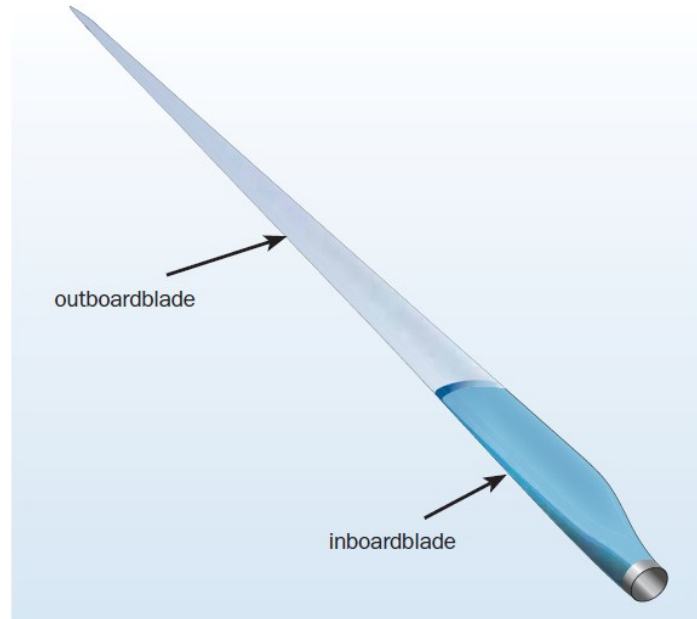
Sectional blade (INNOBLADE®) with bolted joints [48]
